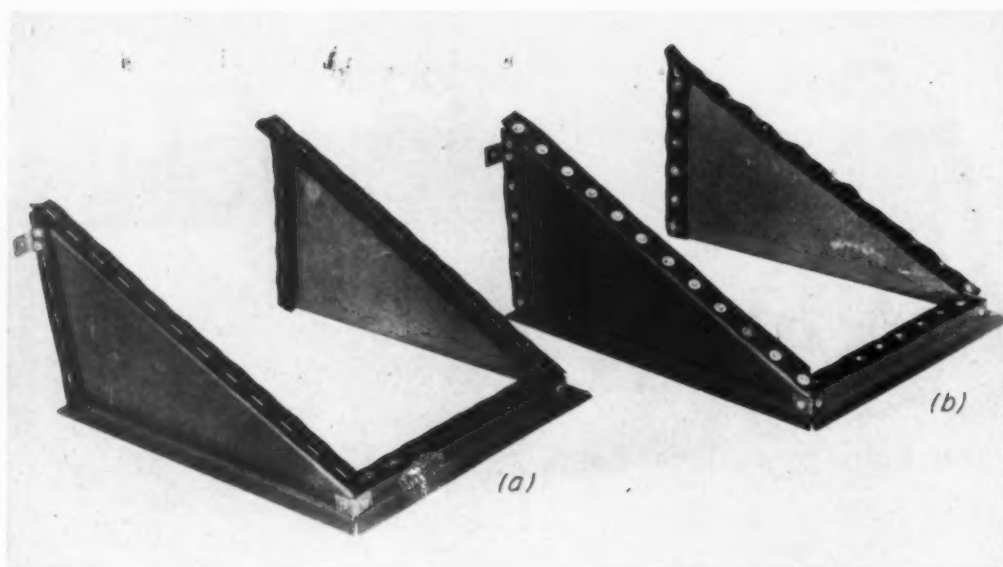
Aircraft part with felt strip stitched to metal form, *a*. At *b* is previous riveted design
